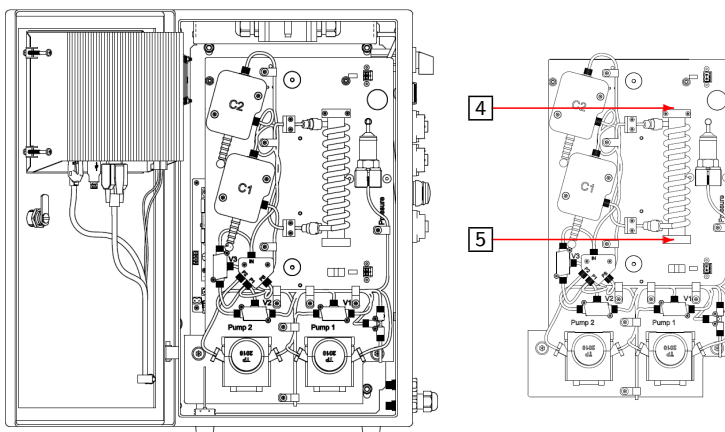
Insert the reactor into the holder (5) and attach the upper reactor holder (4)
